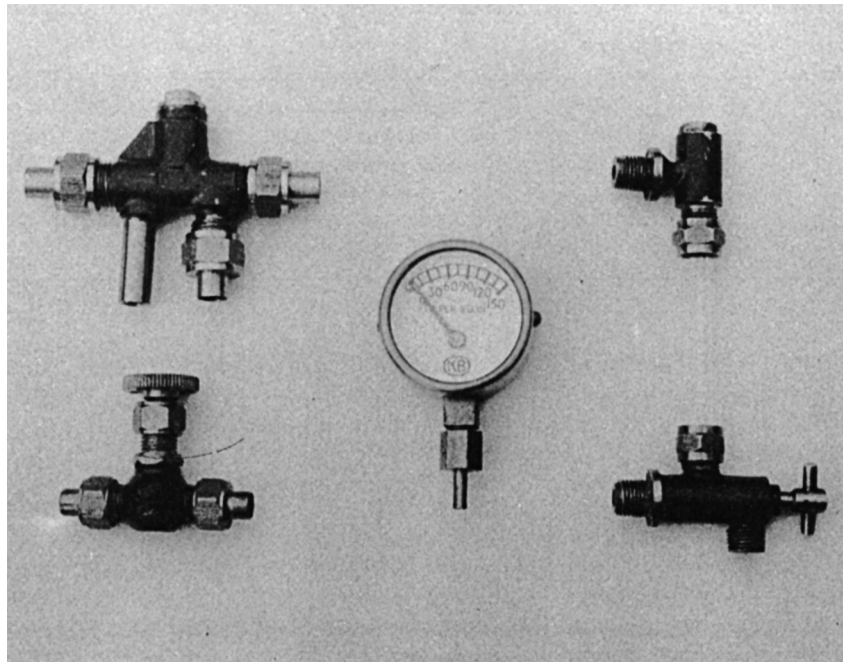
Miniature boiler fittings made from brass: a water-level gauge, a steam valve, a pressure gauge, and a feed-water injector. Brass is so easy to machine that it is good for intricate parts like these.
